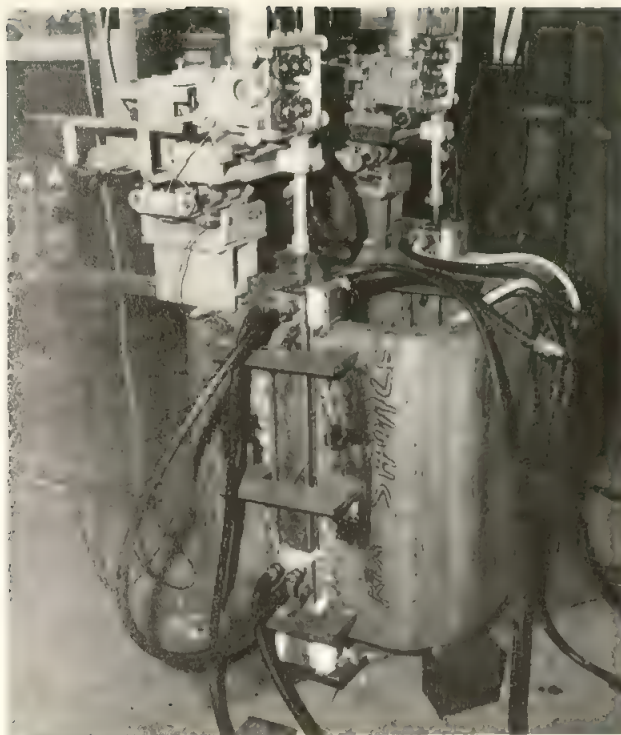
Motor housing: two welds made simultaneously.
